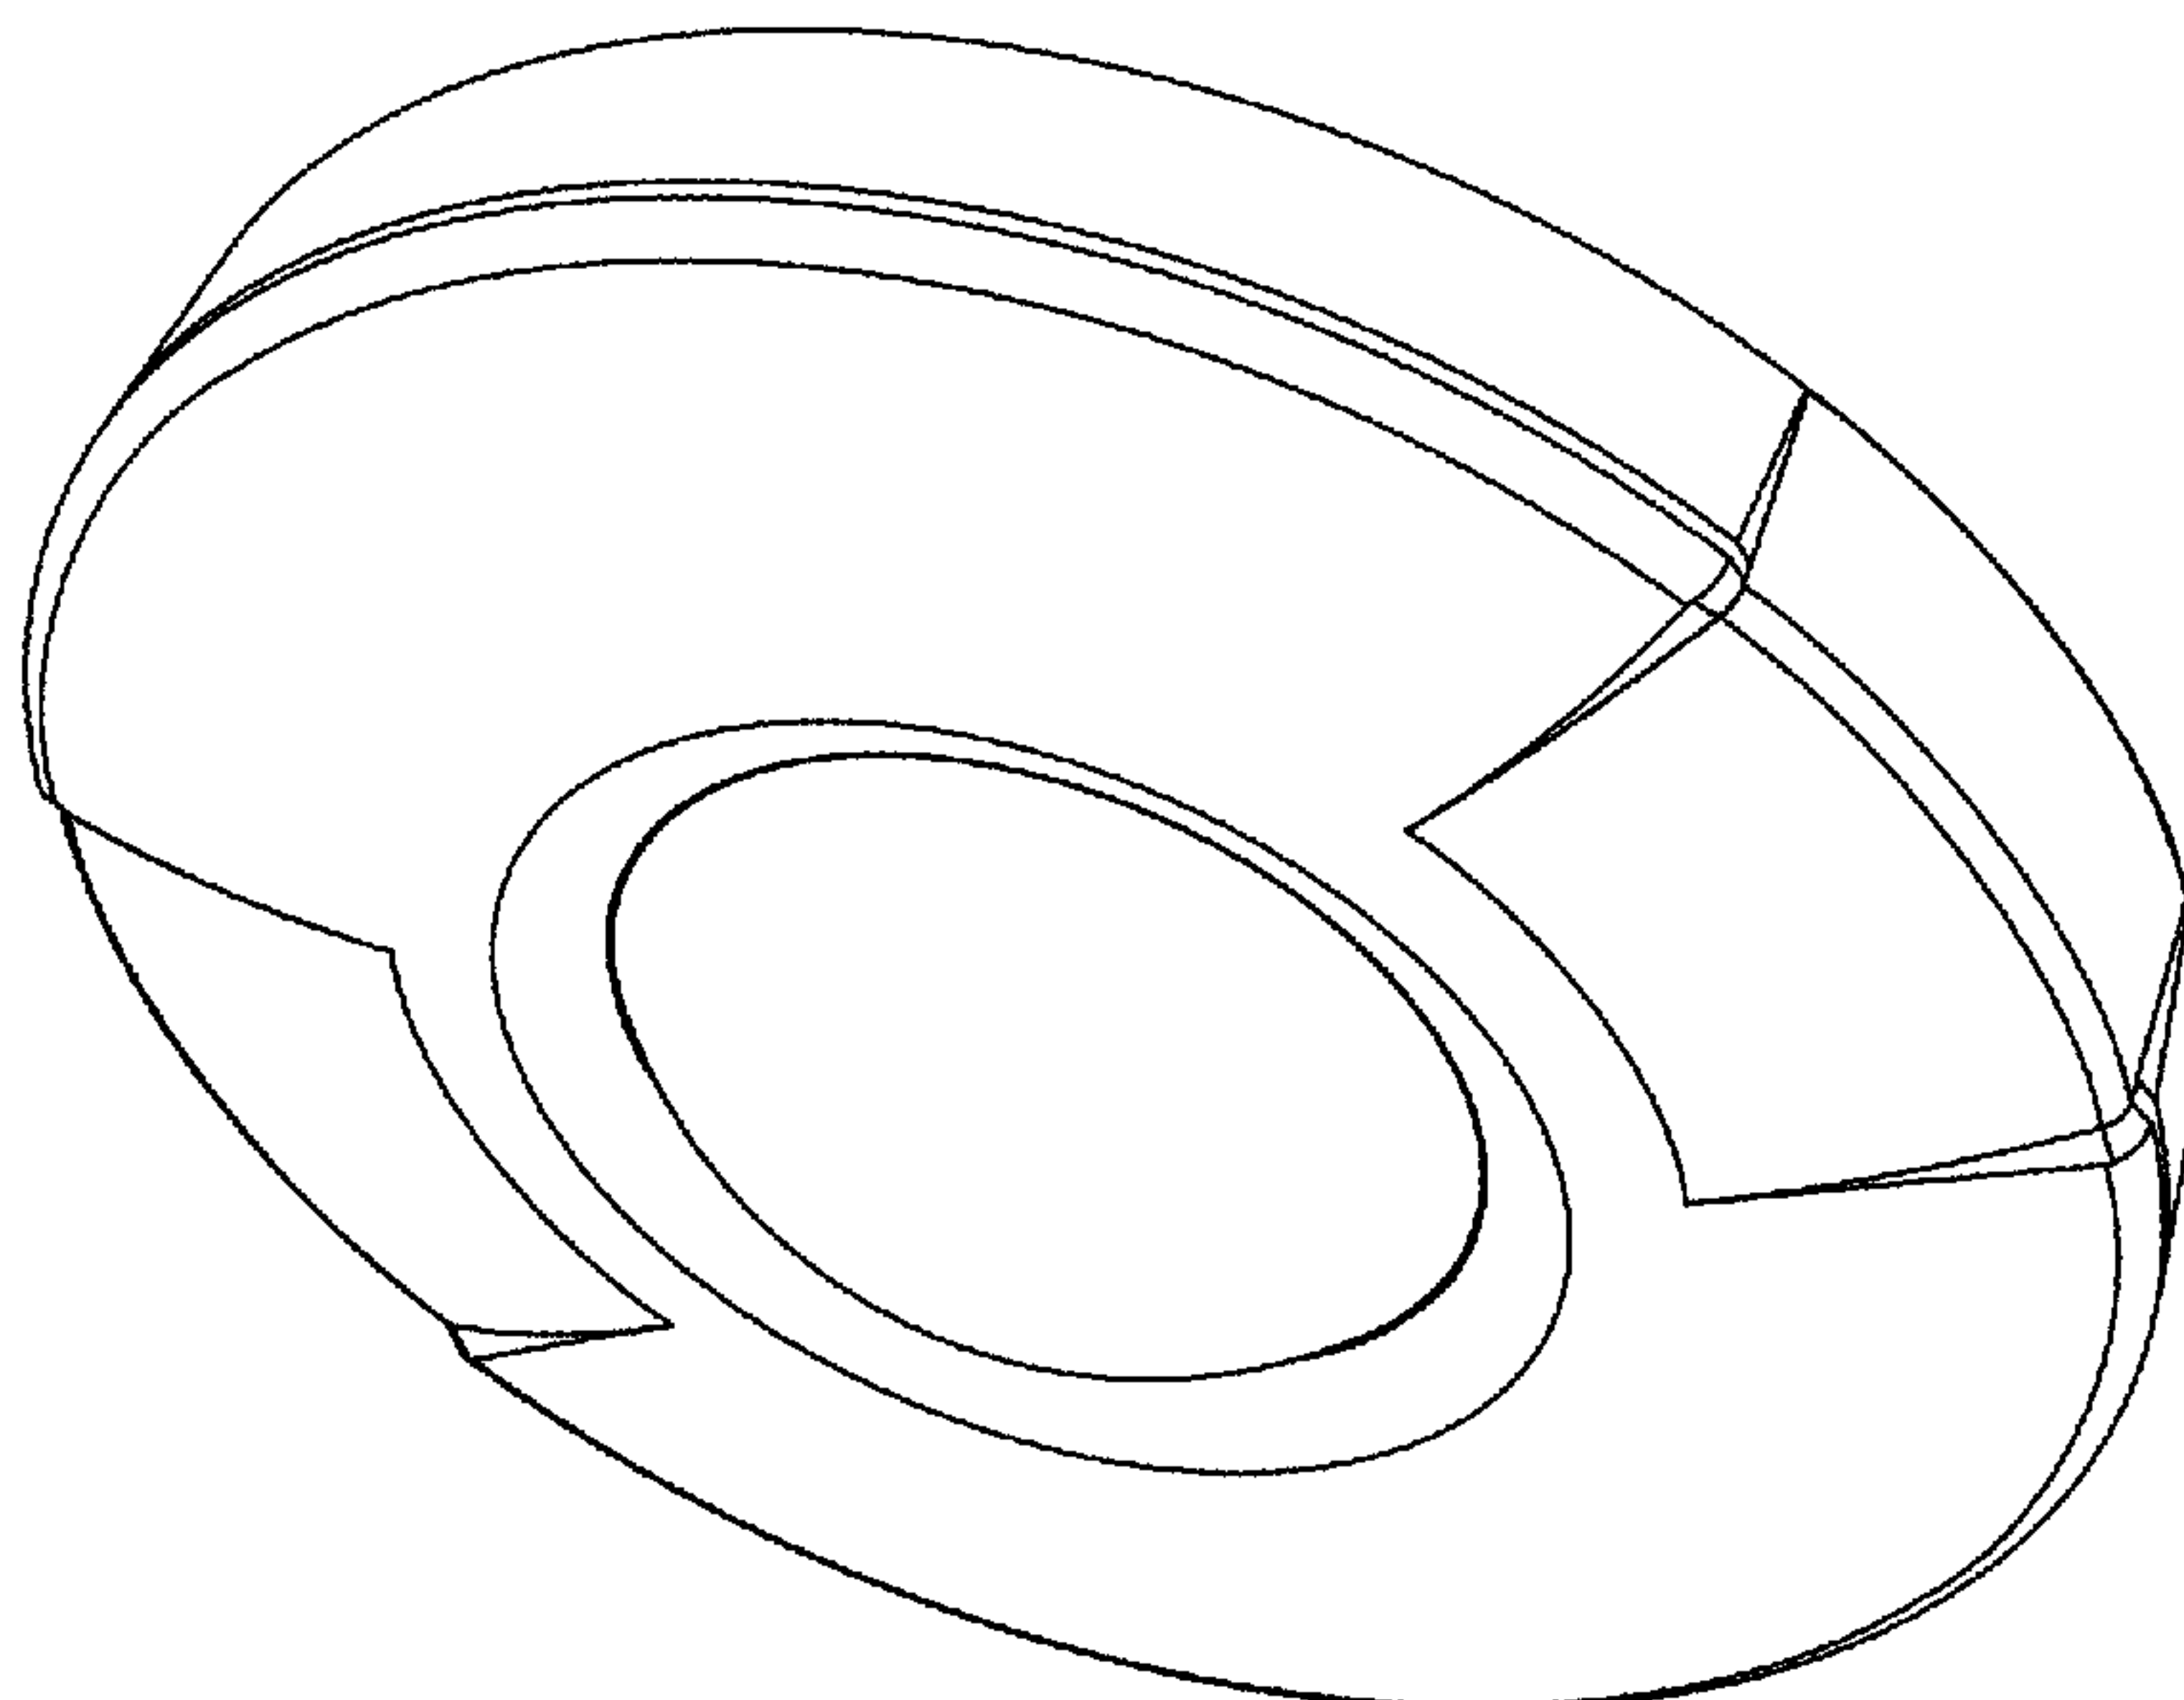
is a bottom view of an embodiment of the ornamental design of the sensor of FIG. 1.
